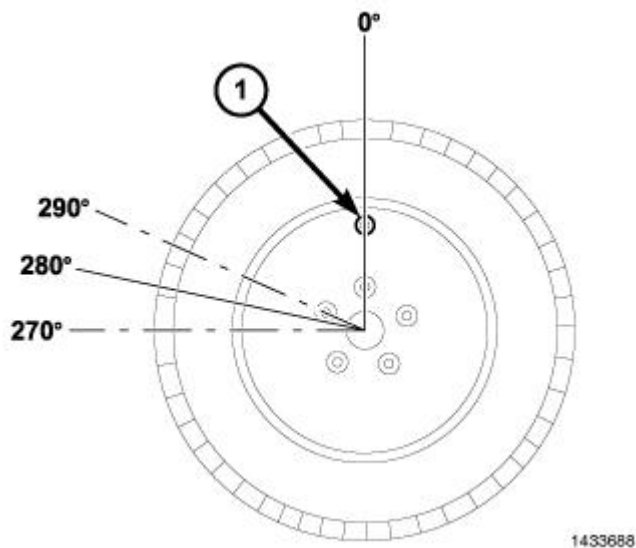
Start Mount/Dismount Tool Within 10 Degrees Of Valve Stem
